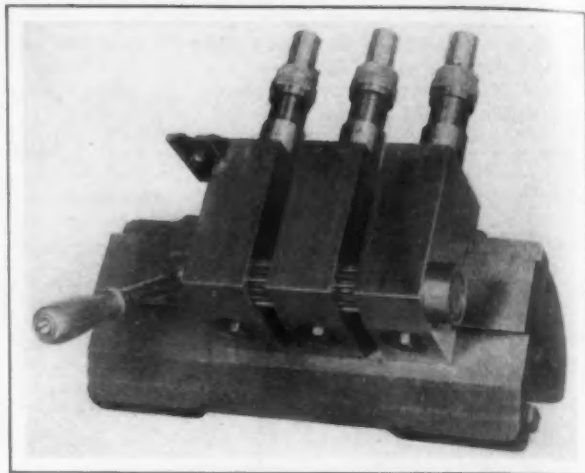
A Tool Holder in Which Three Tools are Moved Simultaneously by the Lever at the Left.
